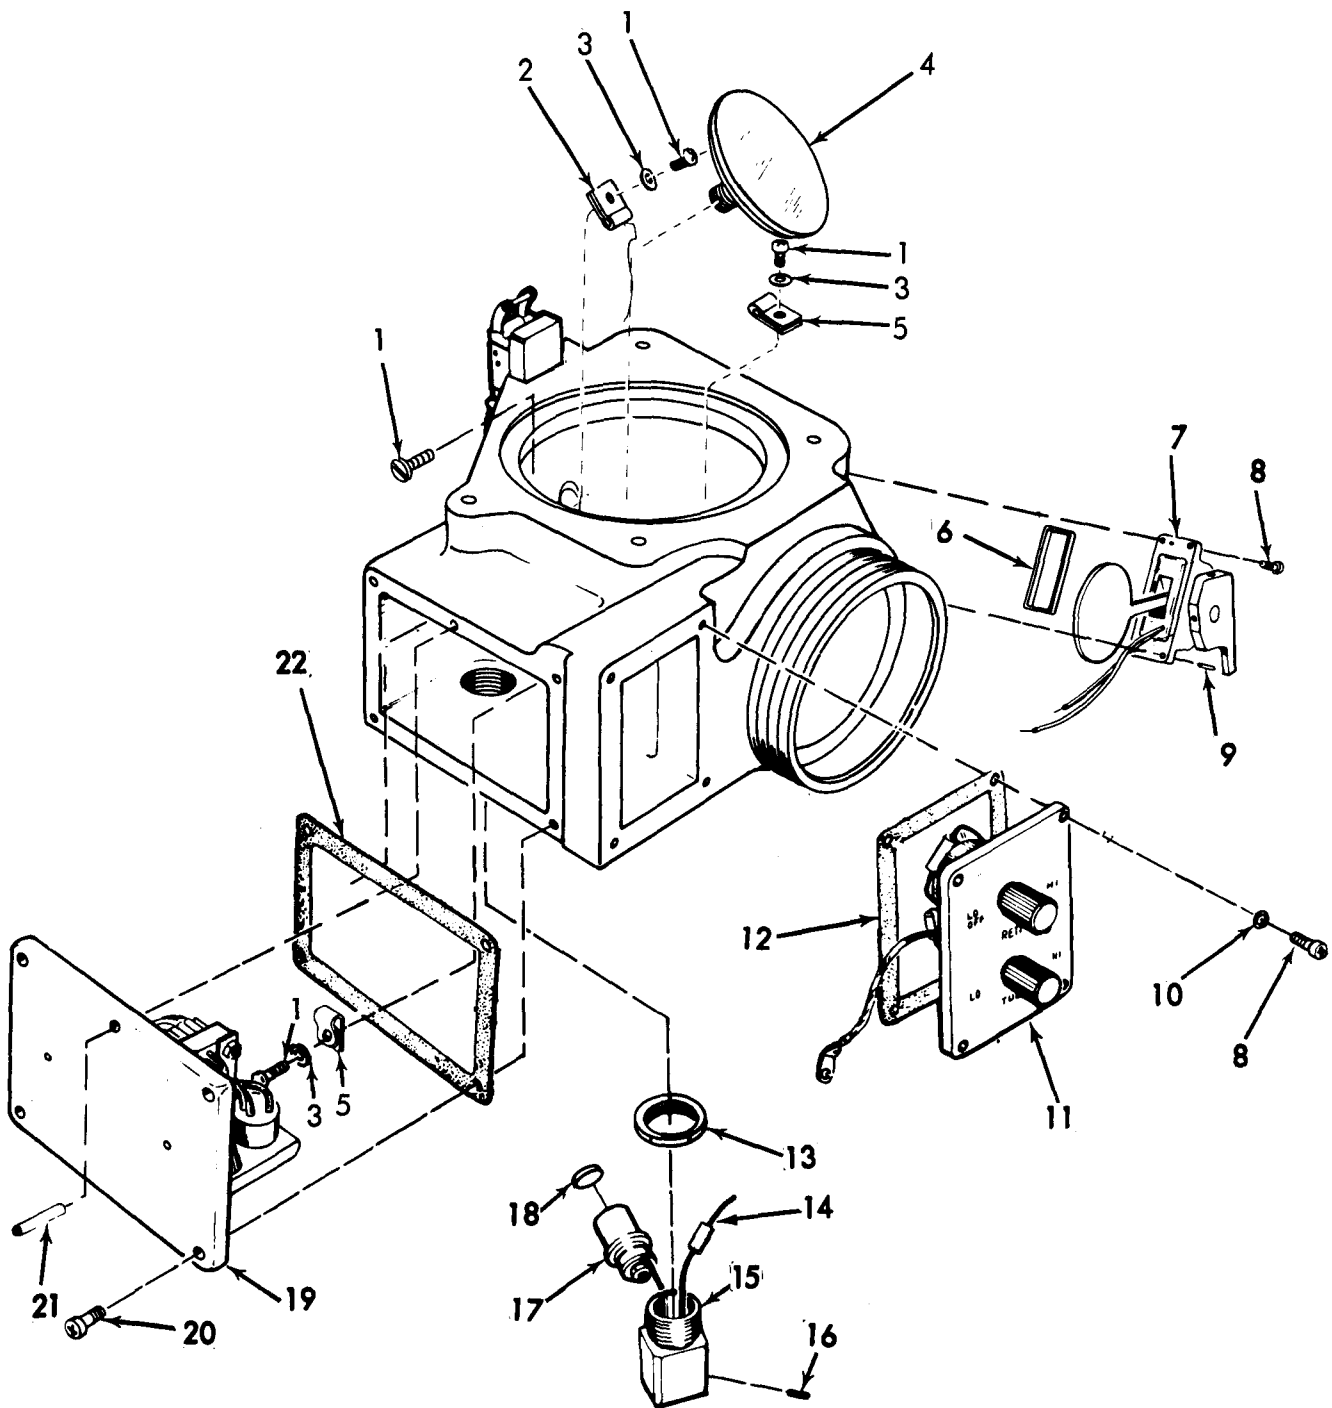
Elbow assembly (passive) 11733401 (partial view-top)
